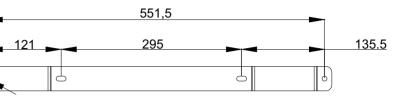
Drill holes' dimensions of R6-8K/10K/15K/20K/25K-T2-32-AUS
